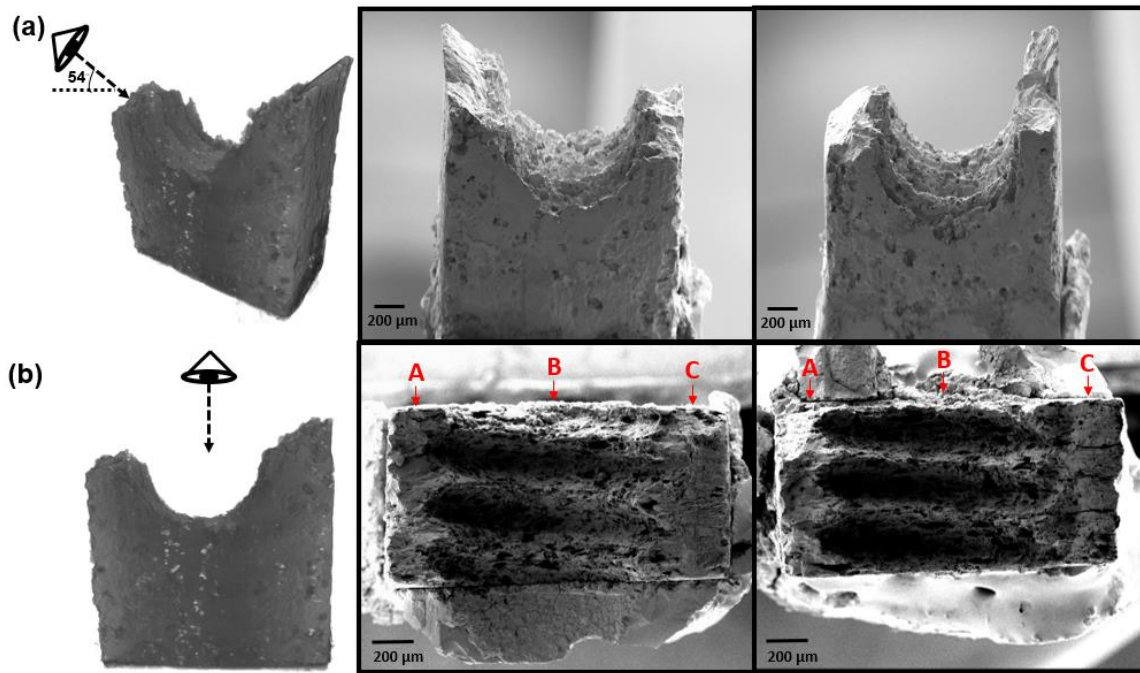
Visualization of fracture surfaces. (a) Angled view of the fracture surface. (b) Top down view of the fracture surface showing three regions A, B and C for each half.
